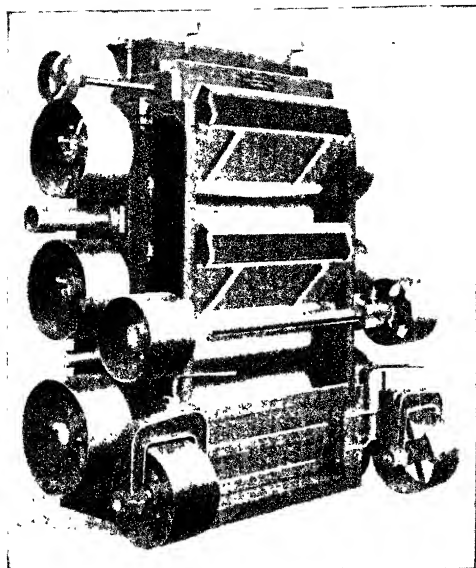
BUCKEYE CRUSHING ROLLS. UNIVERSAL TAKE-UP, SINGLE BELT DRIVE.
